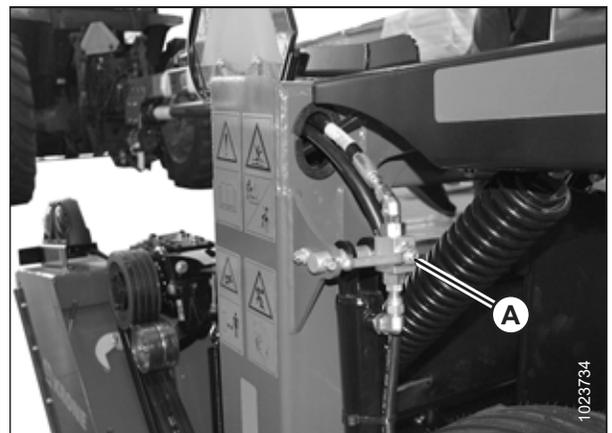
Cylinder Lock-Out Valve in Closed Position
